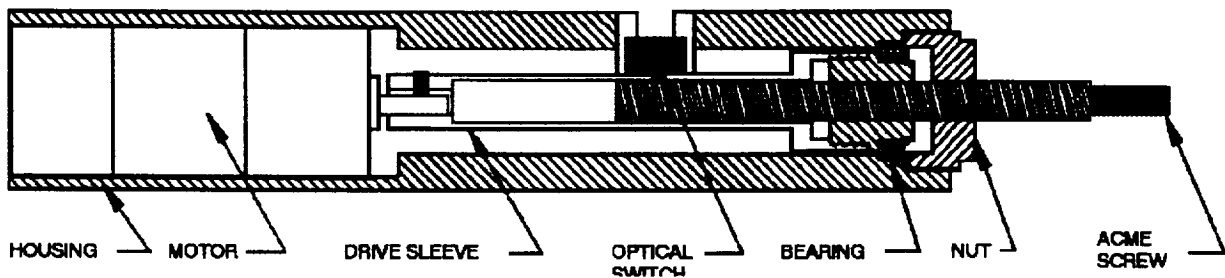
1-Axis Prototype (Phase II) Motor Drive Assembly
